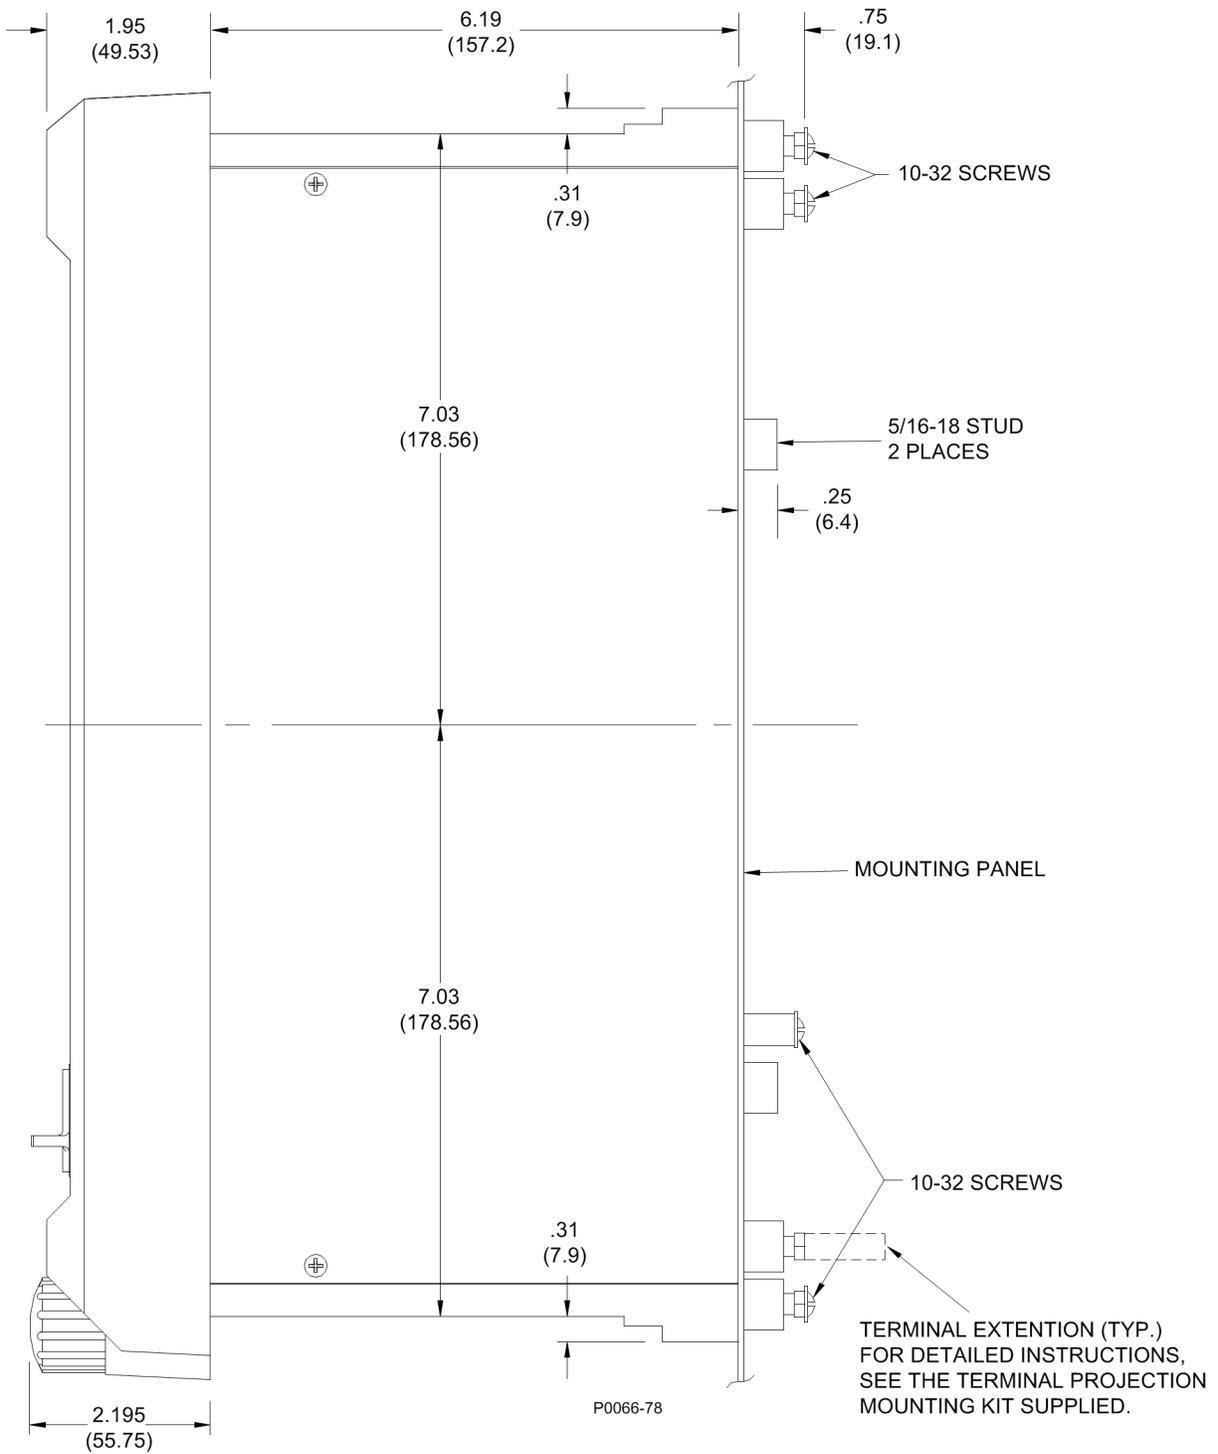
M1 Case Dimensions, Rear View, Double Ended, Projection Mount
